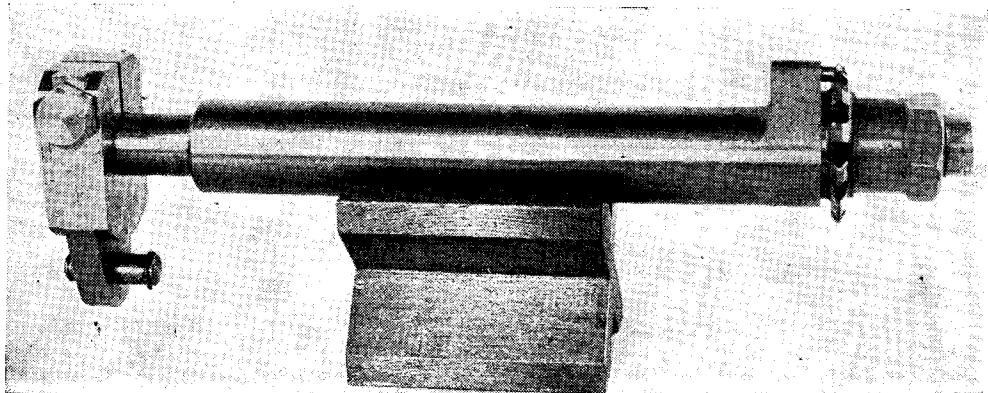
The arbor fitted with its rocking arm. The cutter blank is shown in place
